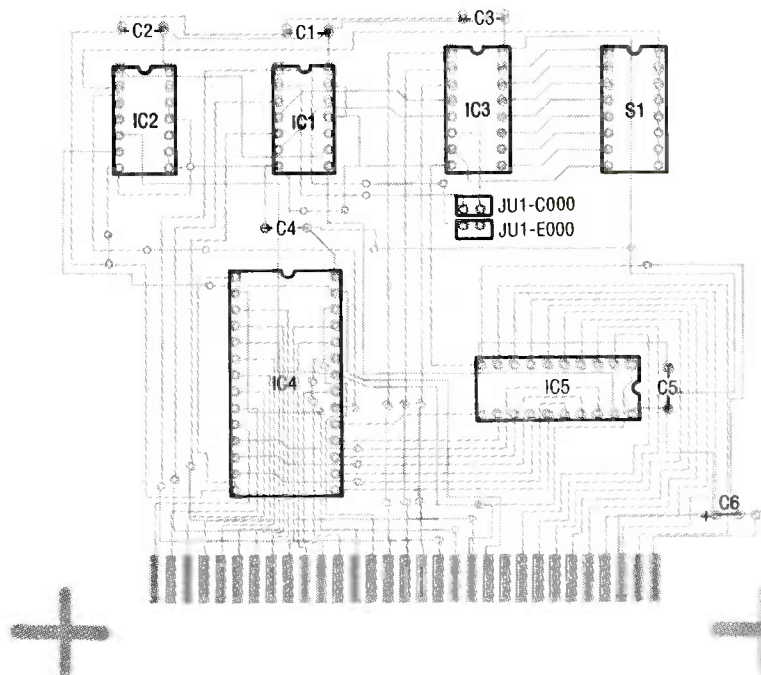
MOUNT ALL COMPONENTS as shown here. Mount the SmartSocket at IC4; use header pins and a jumper at JU1.
